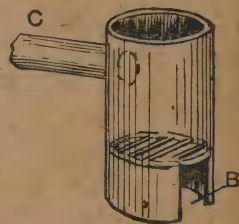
Furnace Made from 12-in. Cast Pipe
